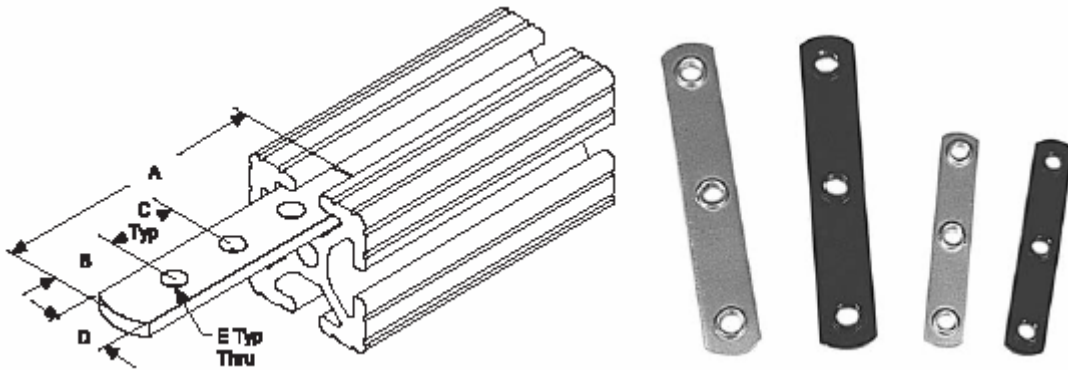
Specialized brackets that slide into the t-slots of standard 8020 extrusions that make it possible to attach pieces.
